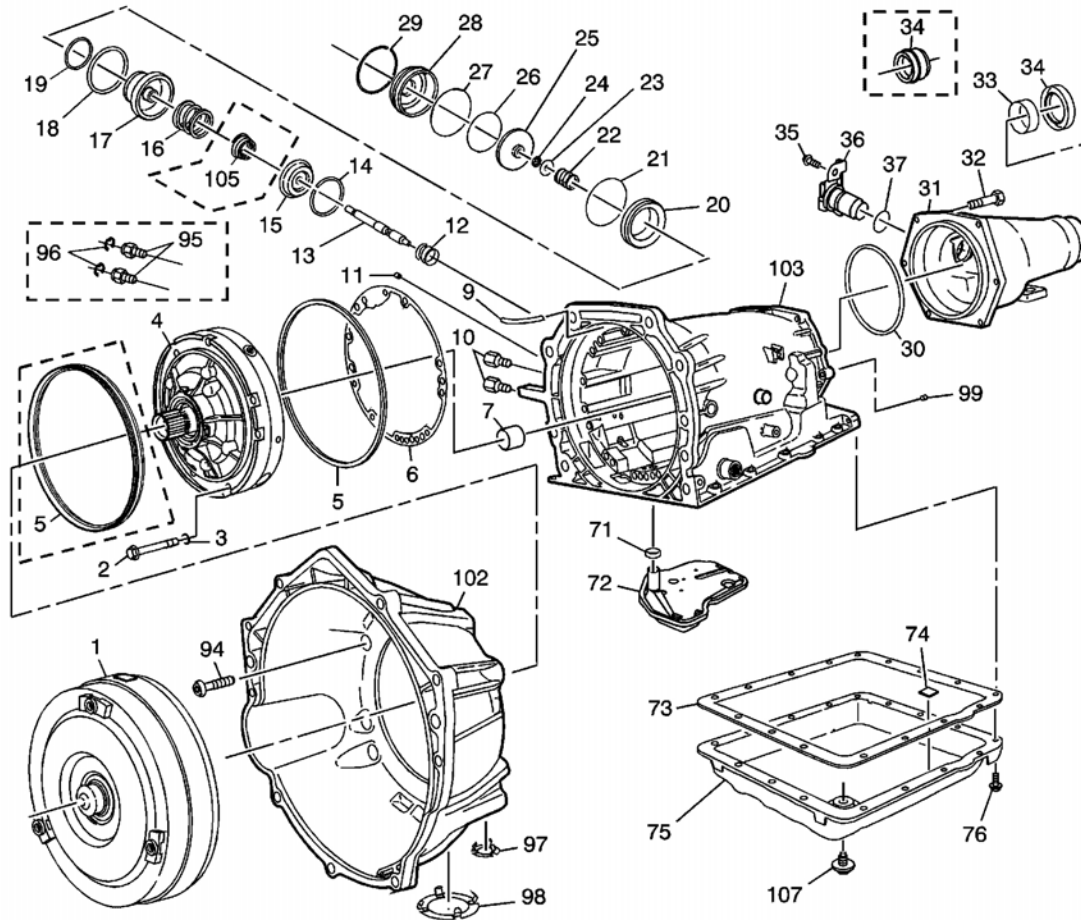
Case & Associated Parts Disassembled Views (1 Of 2)
